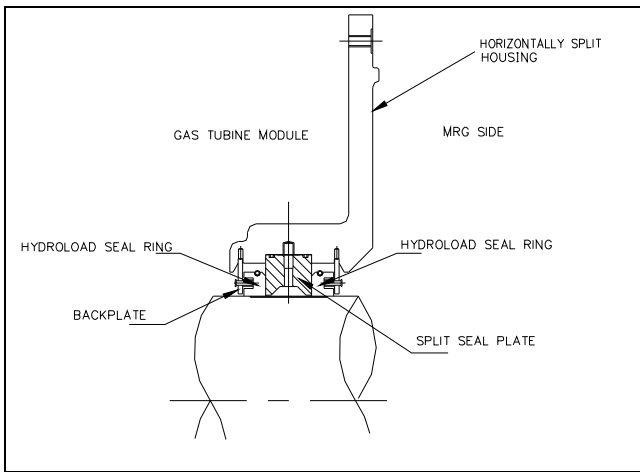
Horizontally Split Seal Housing (8.7” Sealing Diameter)
